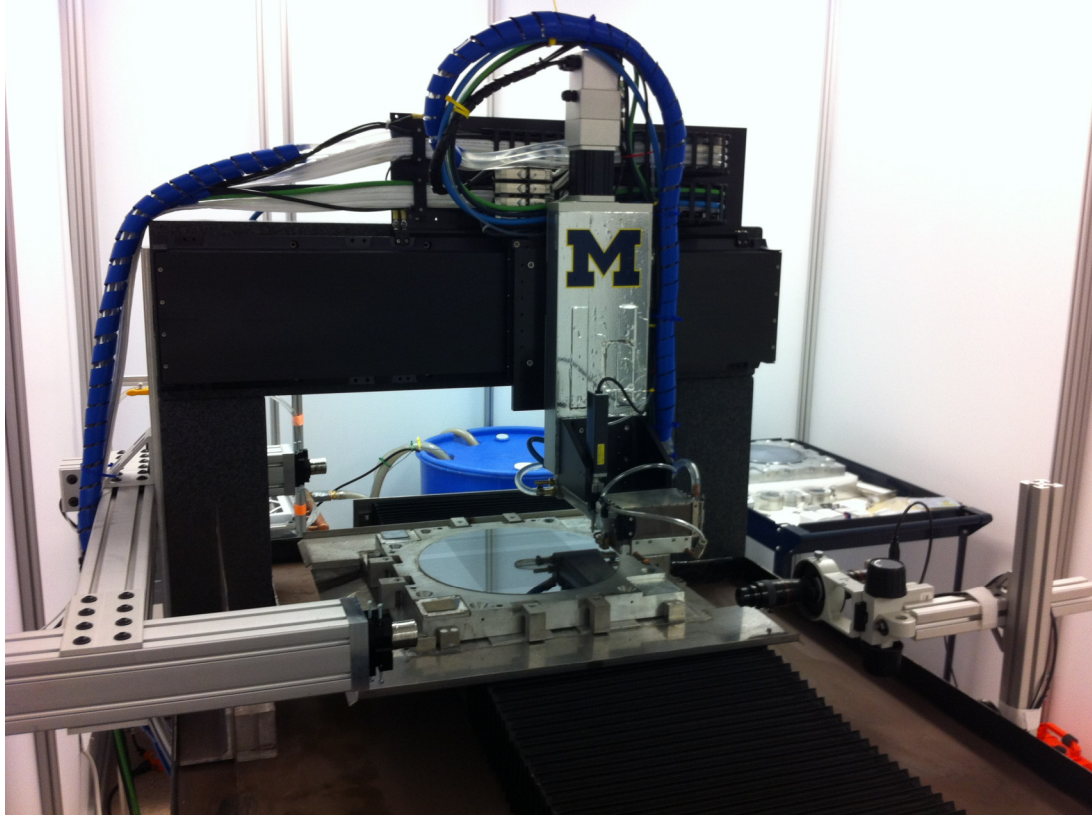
A photograph of the fully integrated dicing system, with a flat test piece mounted.
